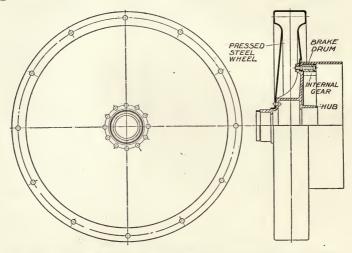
Pressed Steel Rear Wheel for Internal Gear Drive.
